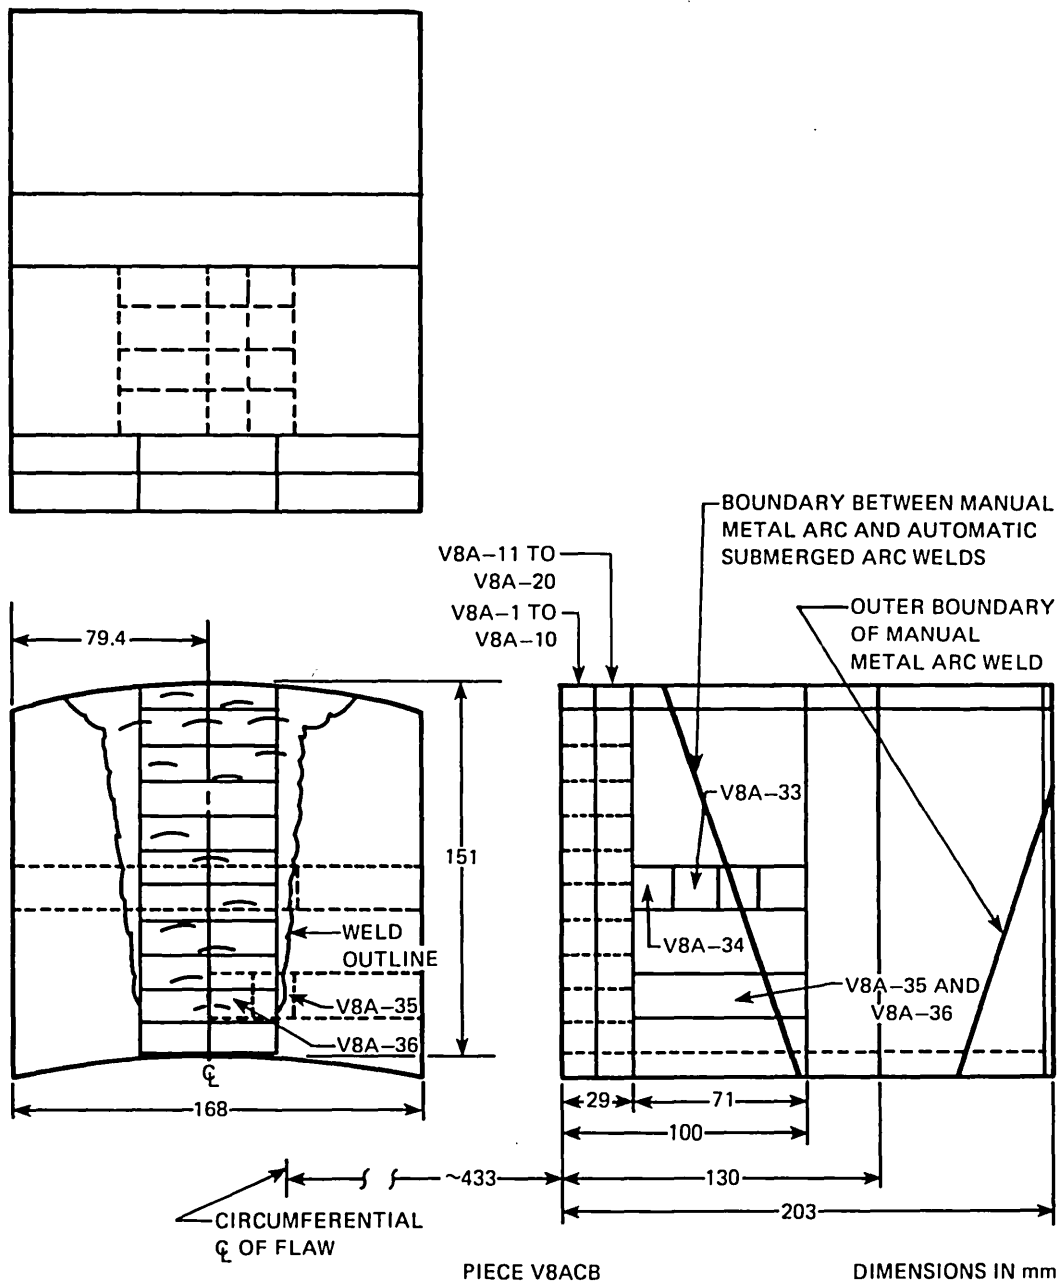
Plan for cutting the special seam weld from vessel V-8A after the test. (a) Location of pieces used for J-integral, Charpy impact, and tension tests; (b) location of blanks for J-integral specimens; and (c) location of blanks for Charpy impact and tensile specimens.
